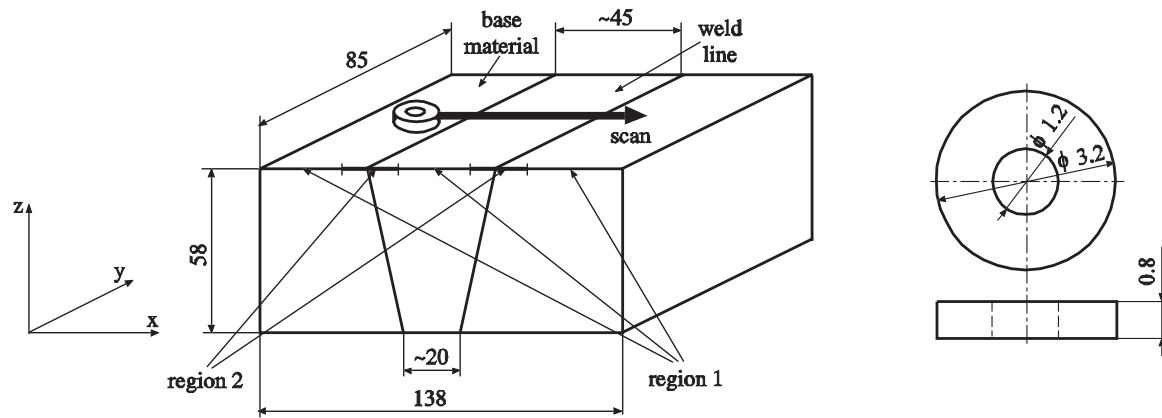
Configuration and dimensions of the specimen and the pancake probe
